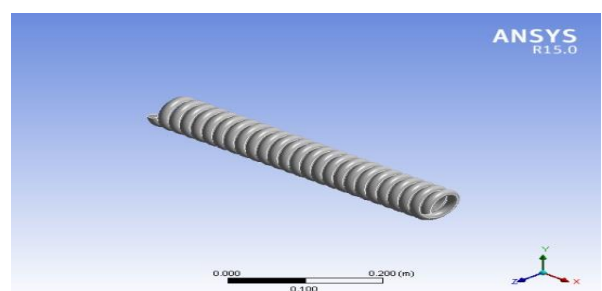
3D model of helical coil heat exchanger with PCD 50 mm and tube diameter 10 mm.
